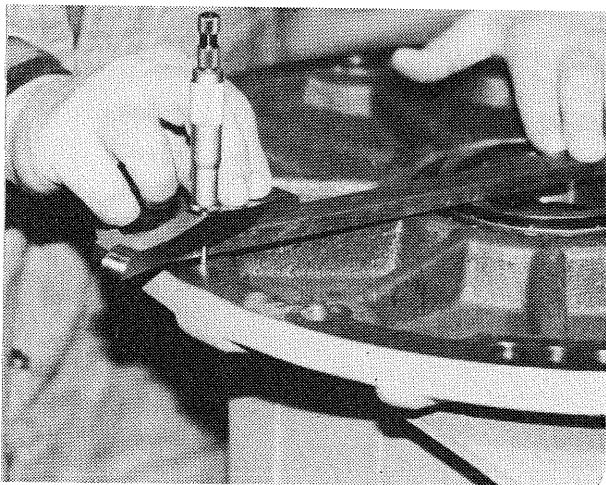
Drum & Freespool Assembly (2 of 7)
